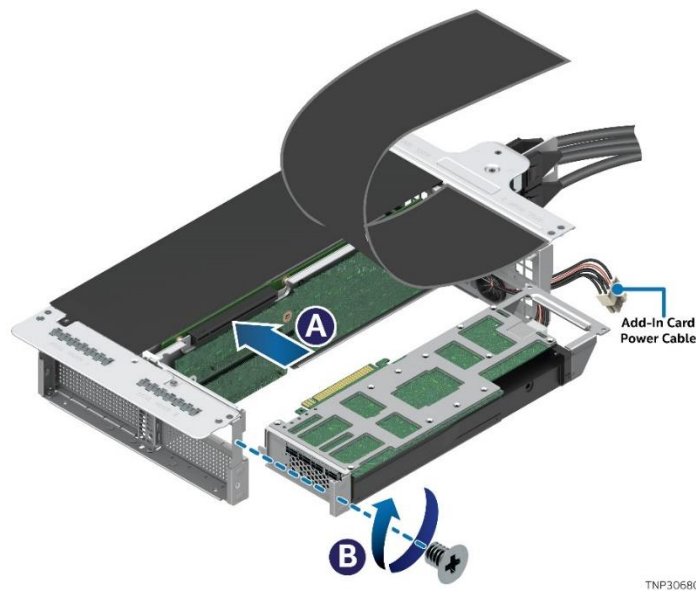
Installing the Accelerator Add-in Card in the Riser Assembly
